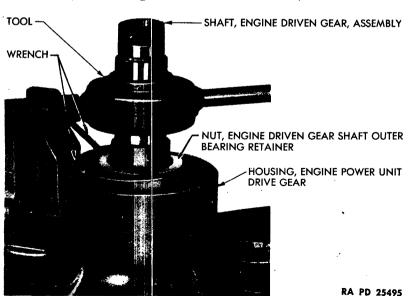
Tightening Engine Driven Gear Shaft Outer Bearing Retainer Nut
